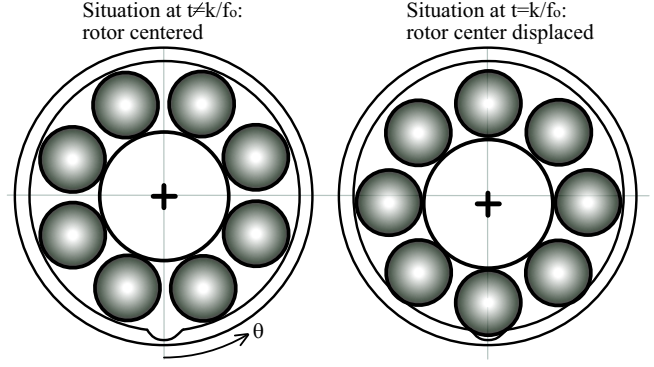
Radial rotor movement due to an outer bearing raceway defect.
